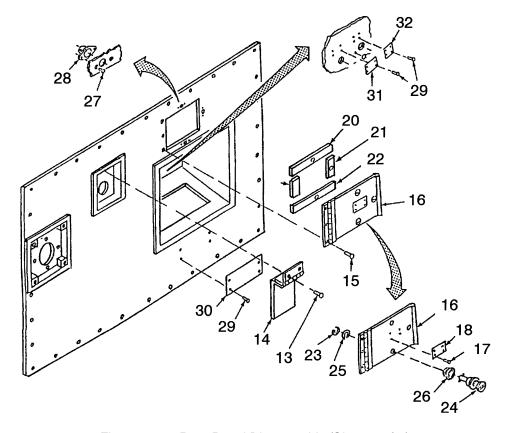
Rear Panel Disassembly (Sheet 2 of 3)
